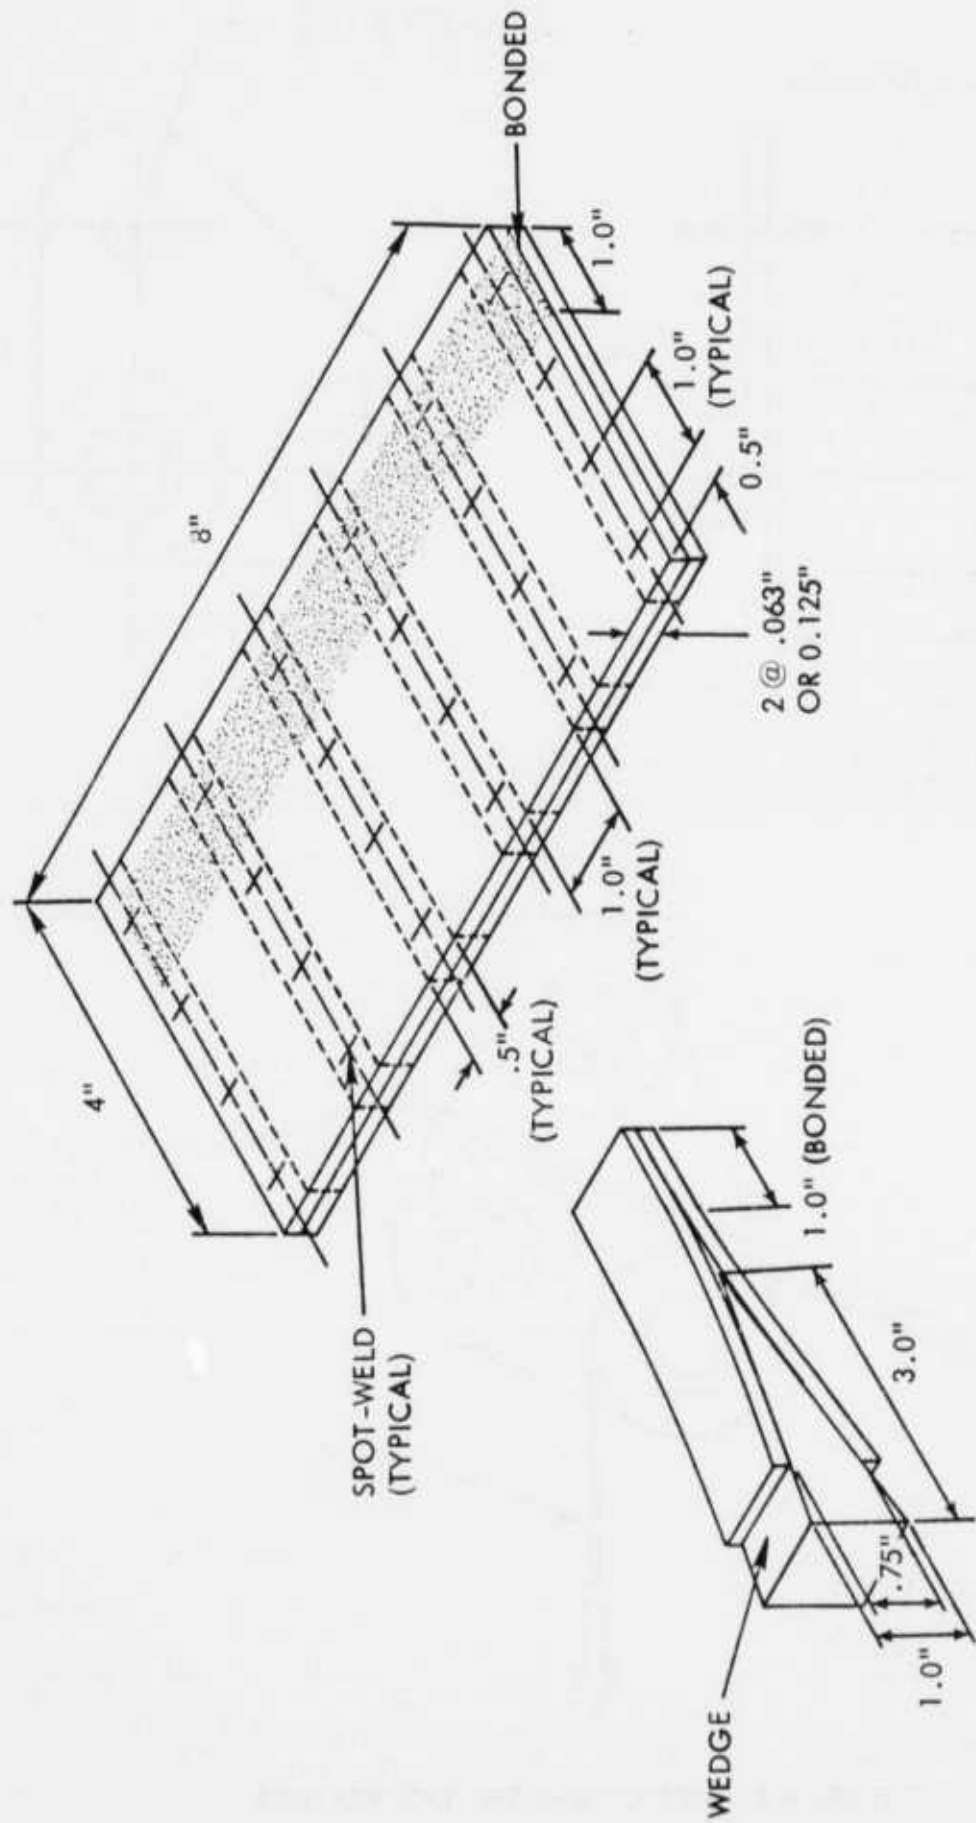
WELDBOND PANEL, WELDBOND WEDGE SPECIMEN
